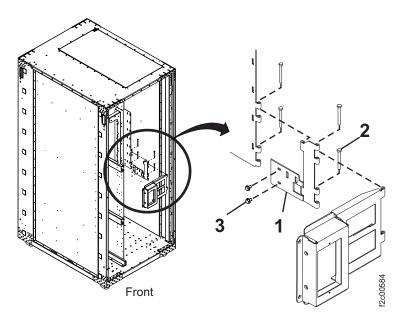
Earthquake resistance kit parts - Relocation bracket for the operator panel
